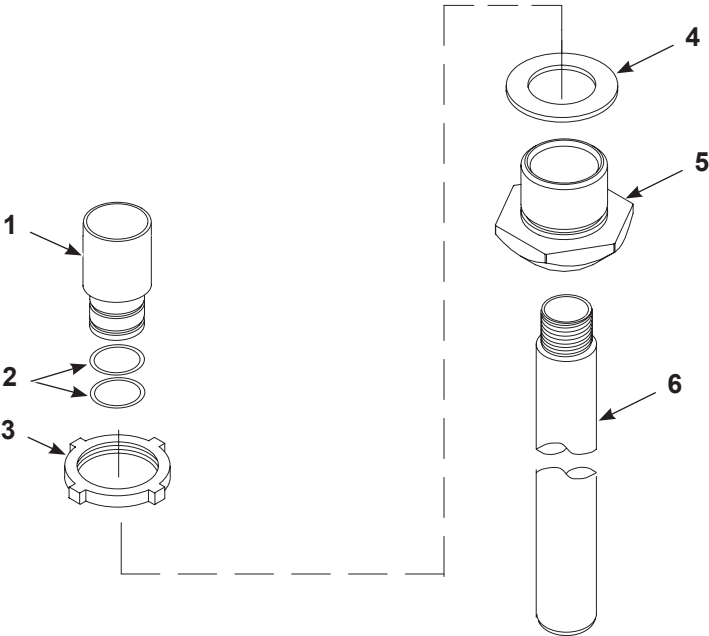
NHR-8-25 and NHR-8-80 Pickup Tube and Pump Adapter
